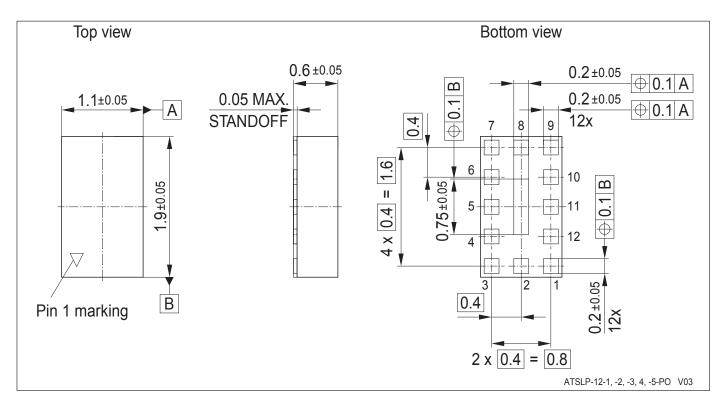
ATSLP-12-1 Package Outline (top, side and bottom views)
